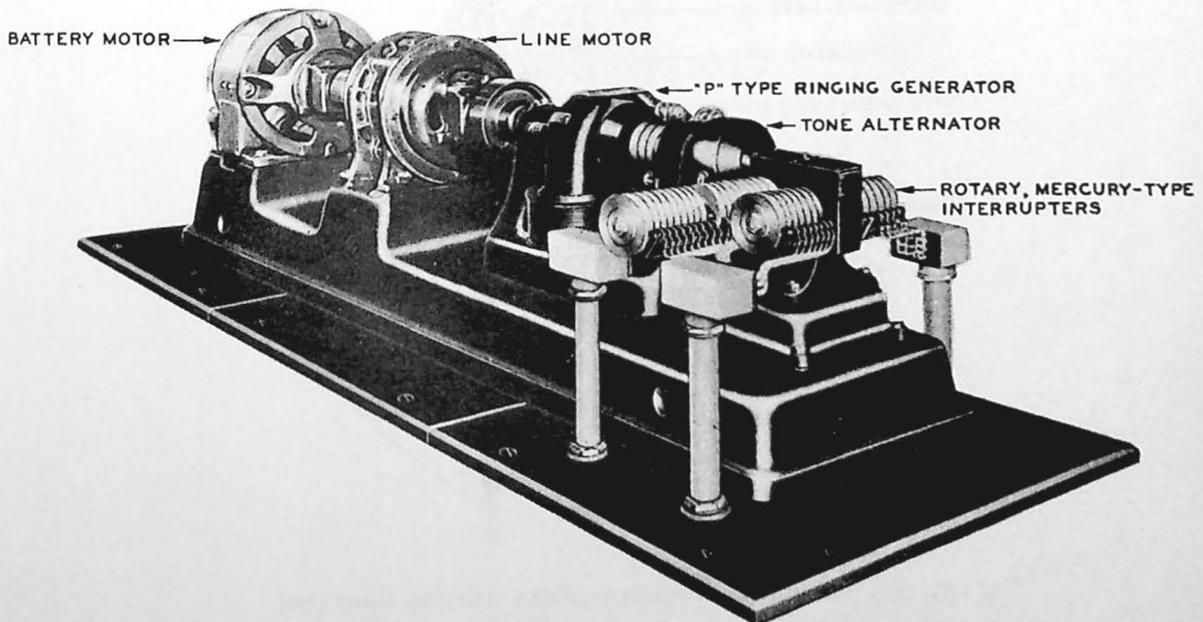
General Assembly of Interrupter With Ringing Machine
